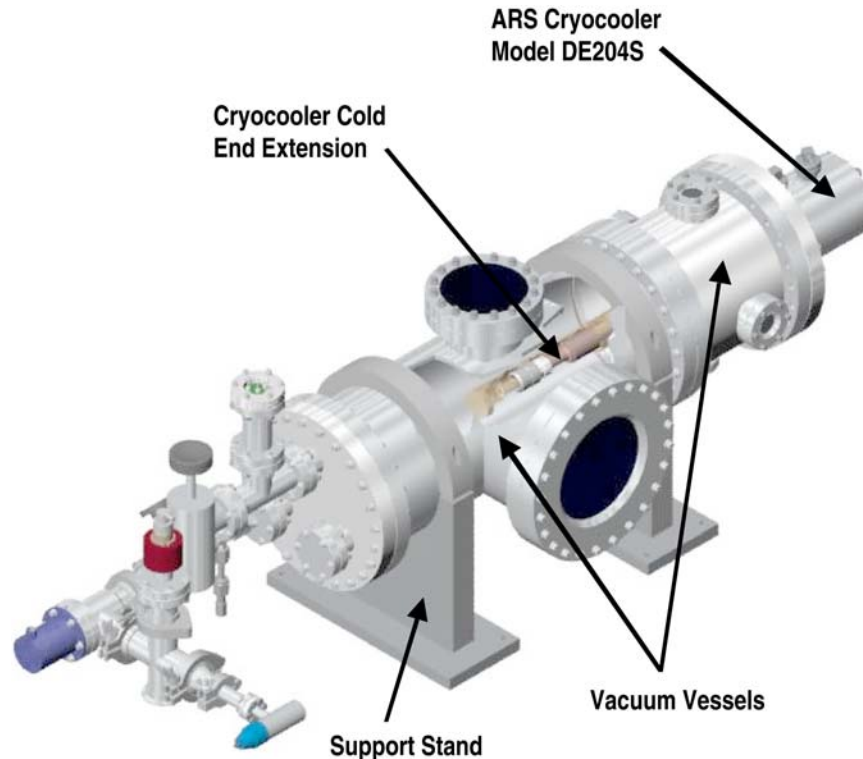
This prototype test setup was designed to test cryocooler performance.
